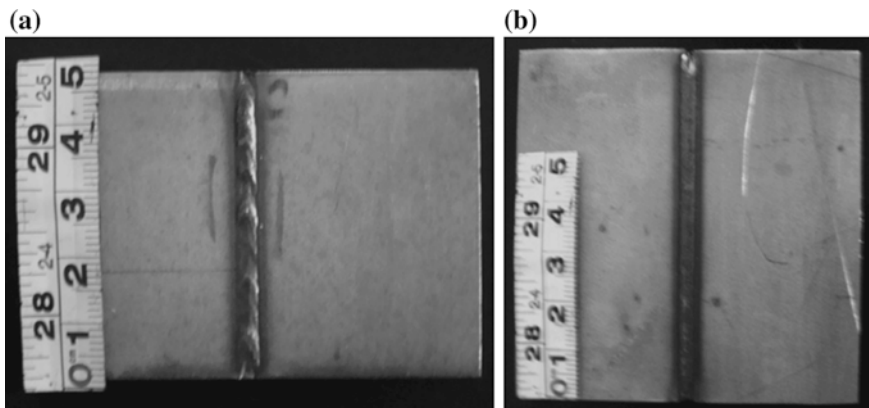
a Weld bead without groove and undulation. b Weld bead With groove and controlled undulation
